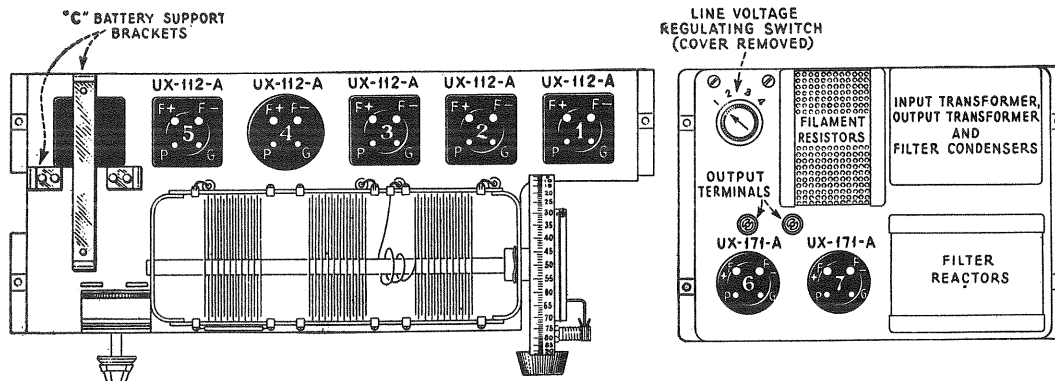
Radiotron socket layout showing filament, plate and grid terminals
